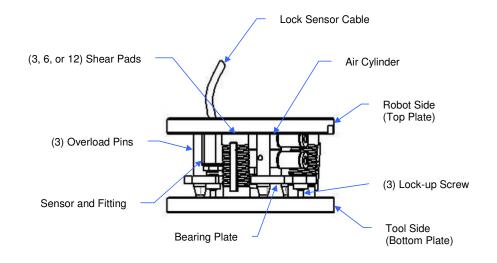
9116 Series Compensator Assembly (Lock-up Screw Bushing Not Shown)
